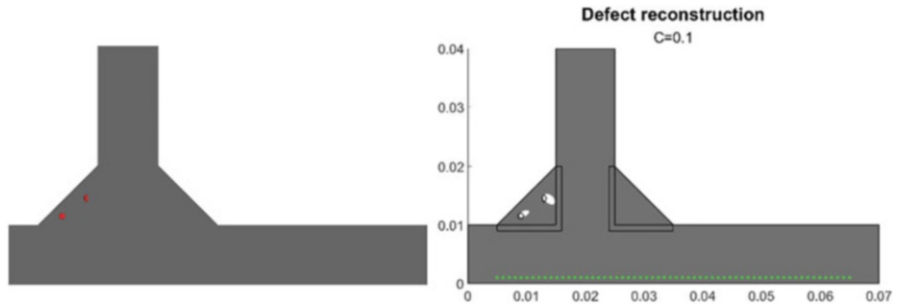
Reconstruction of two defects inside the left welding joint
